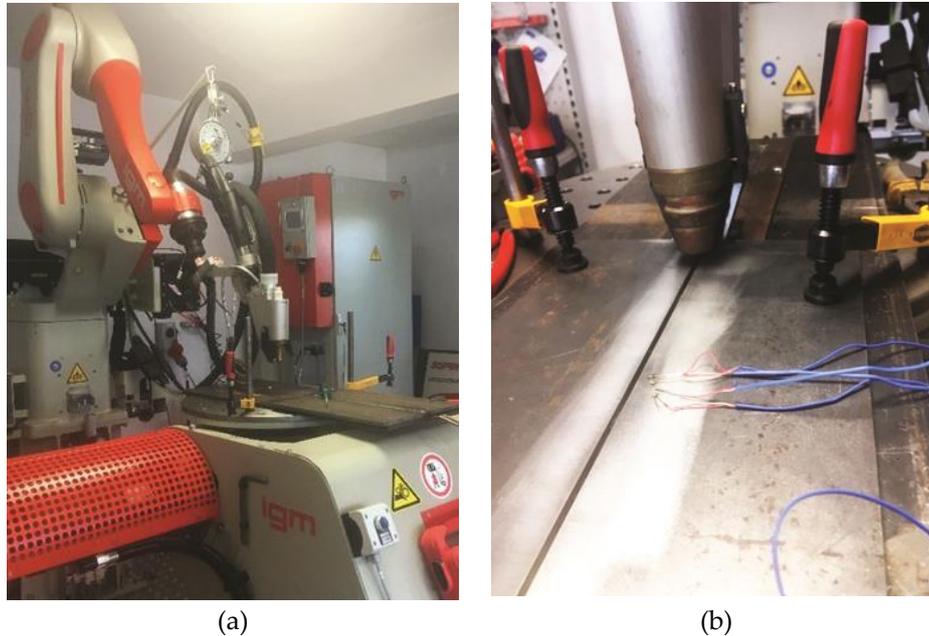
Stand for experimental tests of the plasma-MAG hybrid welding process with temperature registration using thermocouples: a) hybrid welding station with a KUKA KR 16-2f robot, b) welded joint with fixed thermocouples
